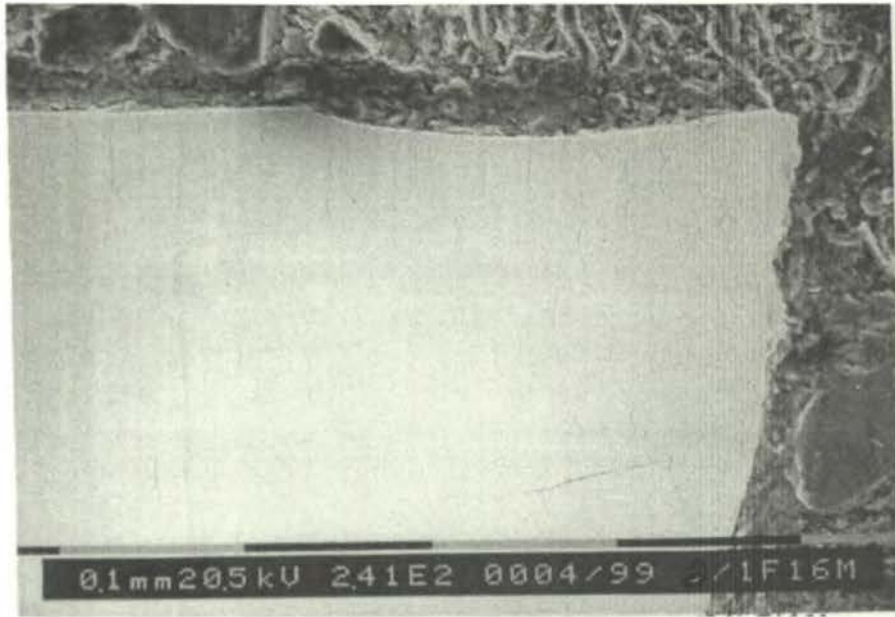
19 Sectioned KC720 tool with plucked rake and flank face after cutting Inconel 718 for 16 minutes at 25 m/min and 0.14 mm/tooth.
